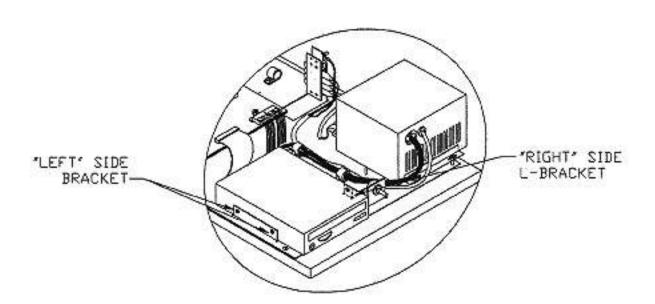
FRONT-ACCESS UPRIGHT/CABARET
